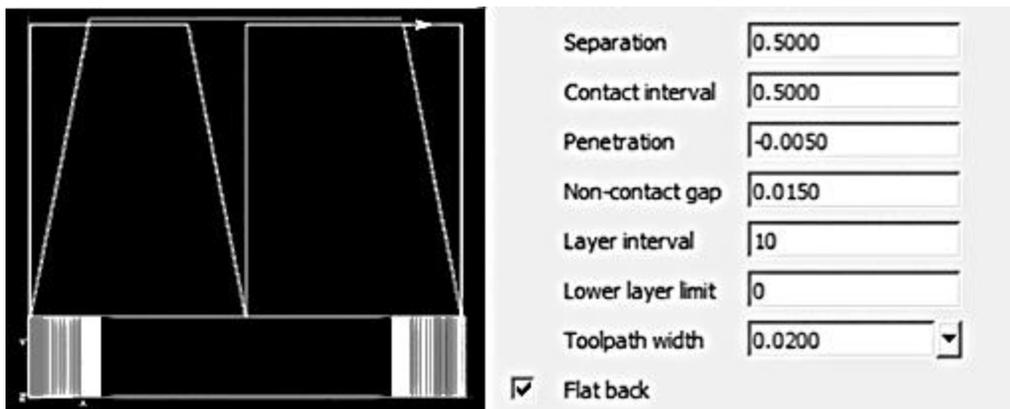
Example of stabilizer wall and settings used in Insight for Type 1 Material.
